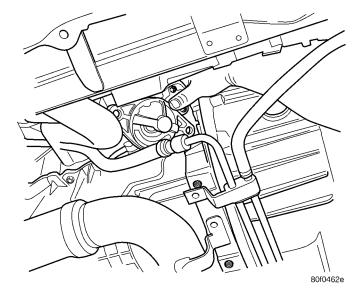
STARTER REMOVAL/INSTALLATION - 2.4L TURBO
